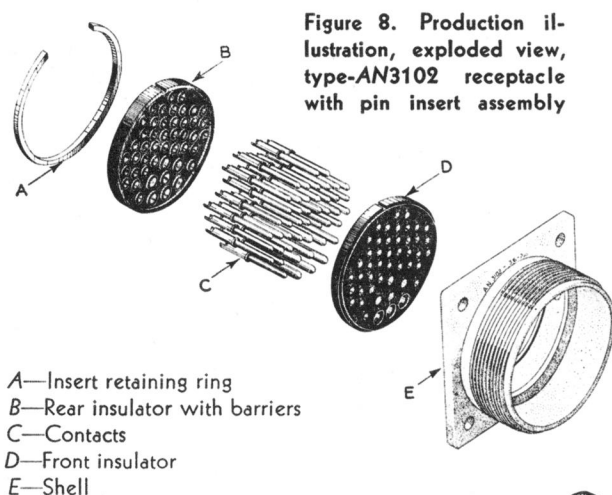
Production illustration, exploded view, type-AN3102 receptacle with pin insert assembly
